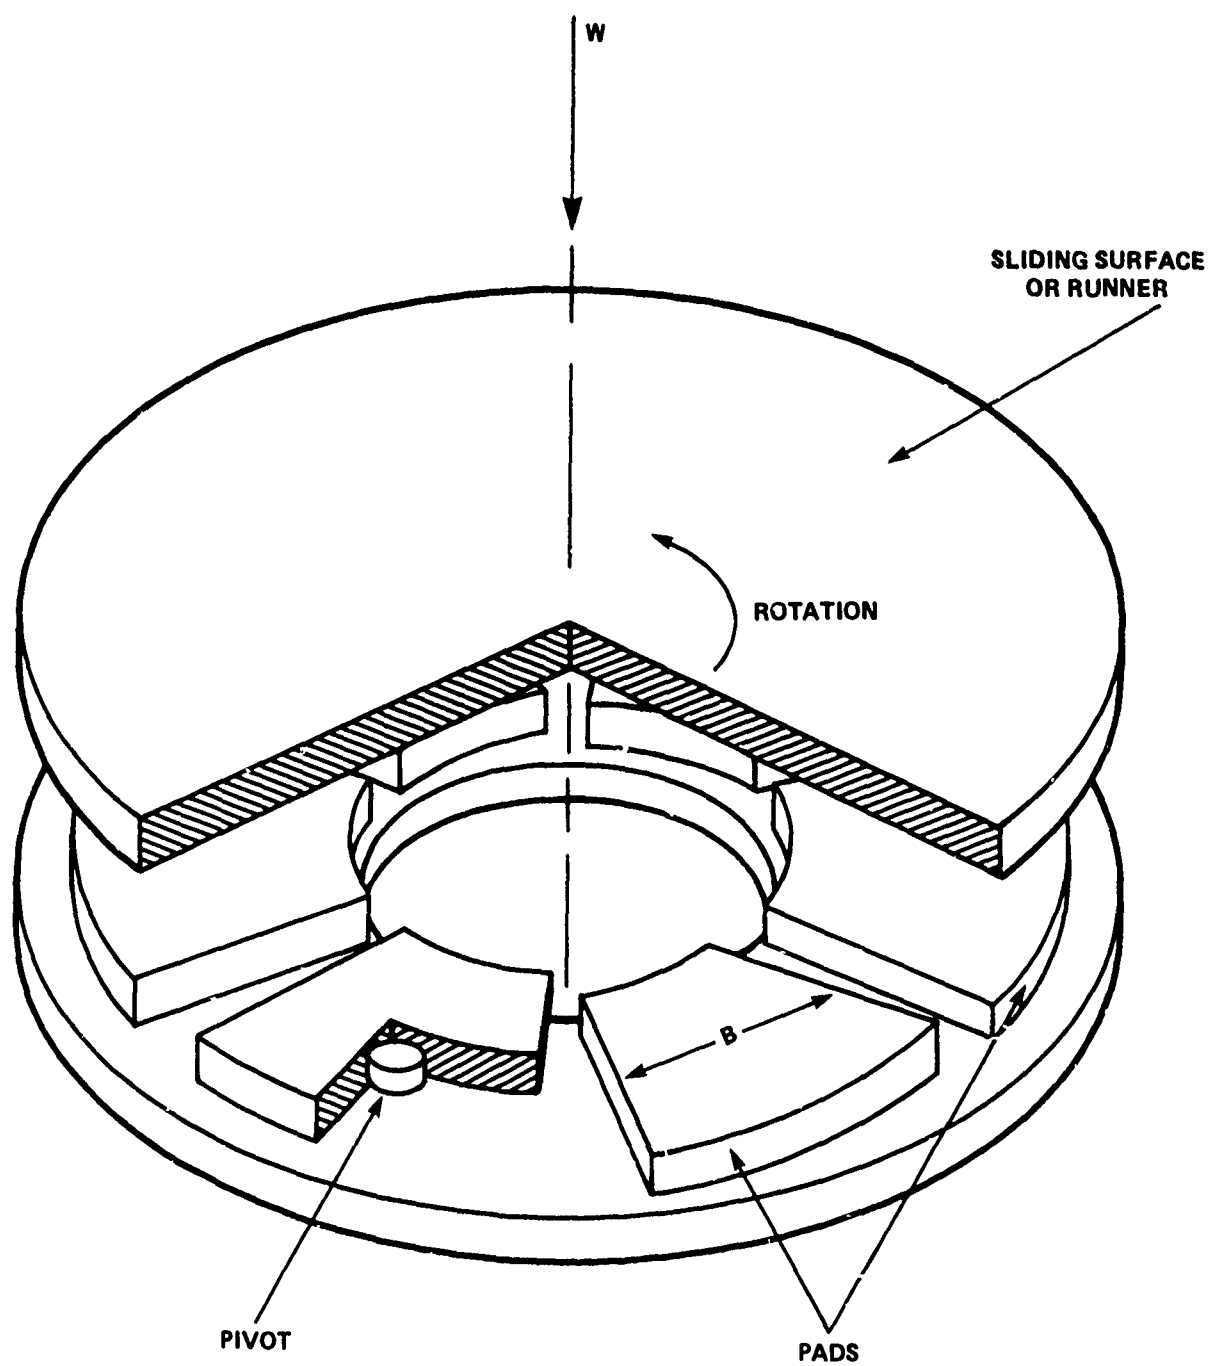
Typical Tilt-Pad Thrust Bearing Assembly
